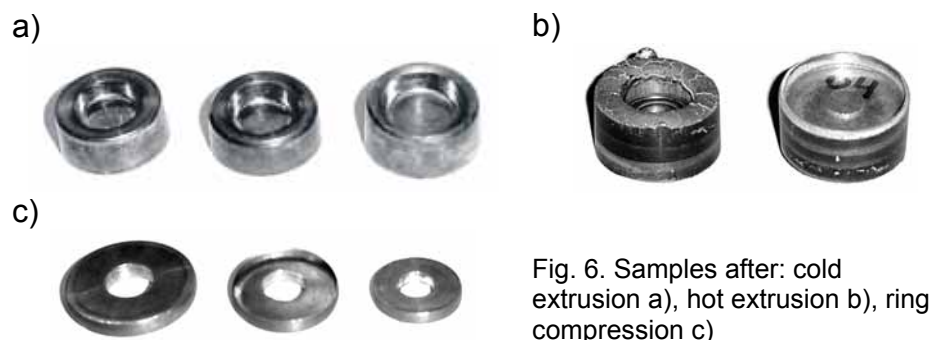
Samples after: cold extrusion a), hot extrusion b), ring compression c)
